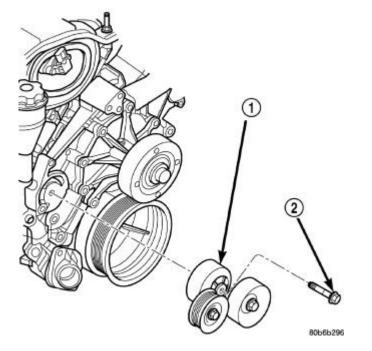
ACCESSORY DRIVE BELT TENSIONER Courtesy of CHRYSLER LLC
